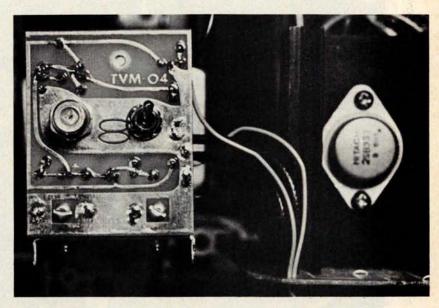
This inside view of the Hitachi Model PA-8 television set shows how the TVM-04 printed circuit board is mounted on the metal frame near the power transformer.
